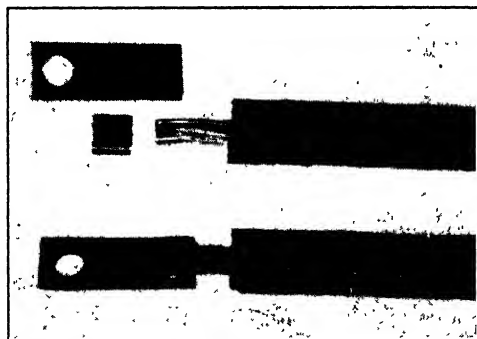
Silver-brazed lead and terminal assembly for a transformer before and after brazing.
